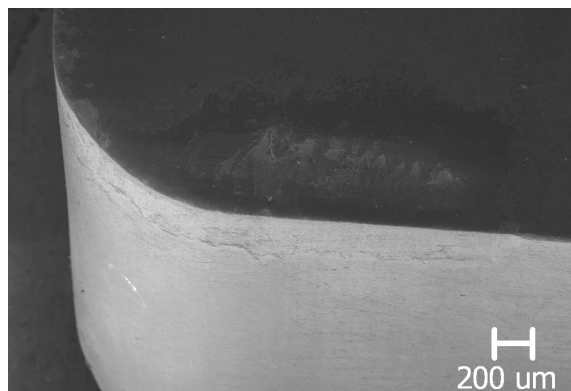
Worn coated carbide insert after machining AISI 1047 steel with MQF technique at a flow rate of 20ml/h.
